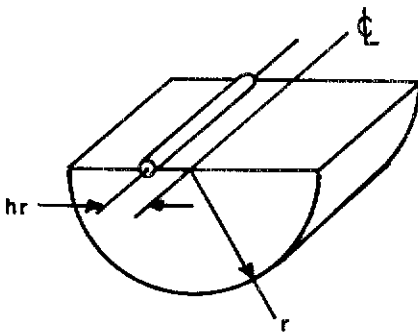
A "midline" capacitor is made by off-setting the rotor shaft on the semicircular rotor-plate assembly.
